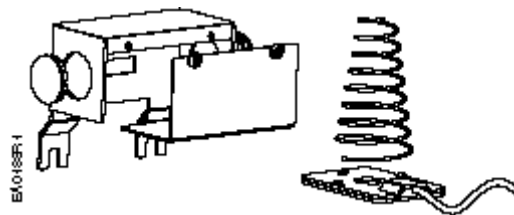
Packing Heating Element for Use with SKB/C, 12-inch Pneumatic Actuators.
